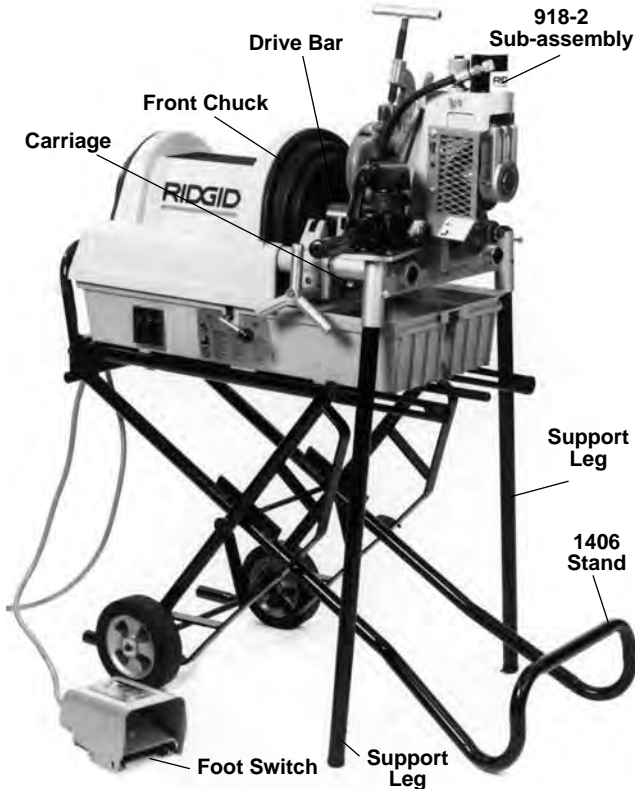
918 Roll Groover Mounted on 1822 with 1406 Stand
